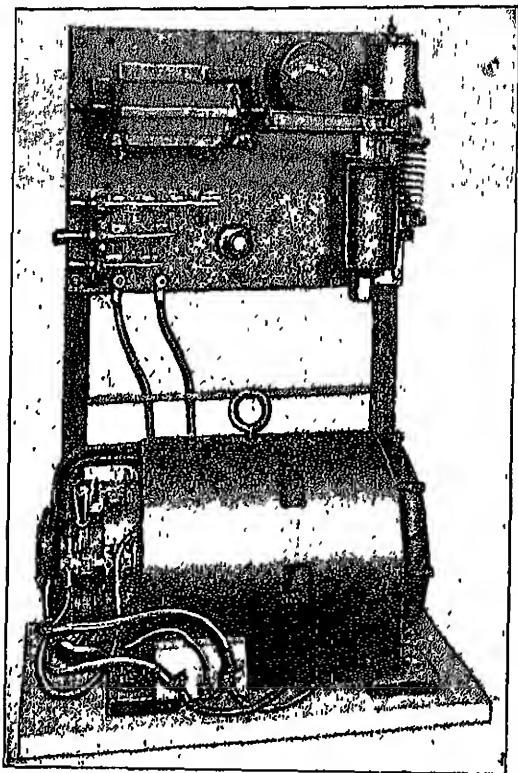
“Plastic-Arc” Dynamotor Welding Unit.
